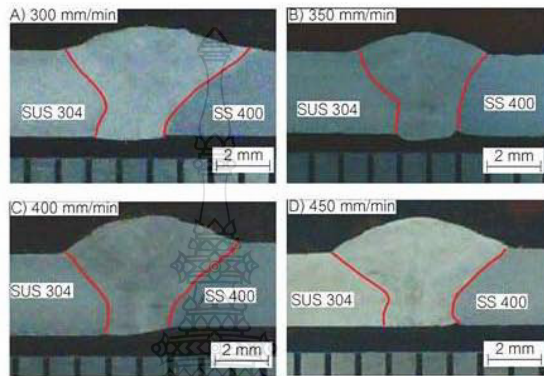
Macrostructure of welded joint produced by various welding speeds.
